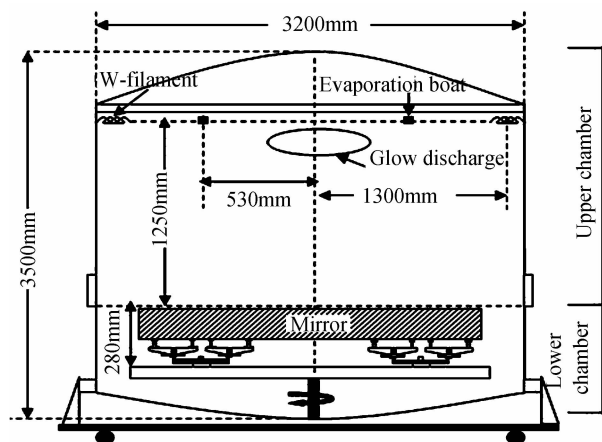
Configuration and dimensions of the 3.2 m coating machine
